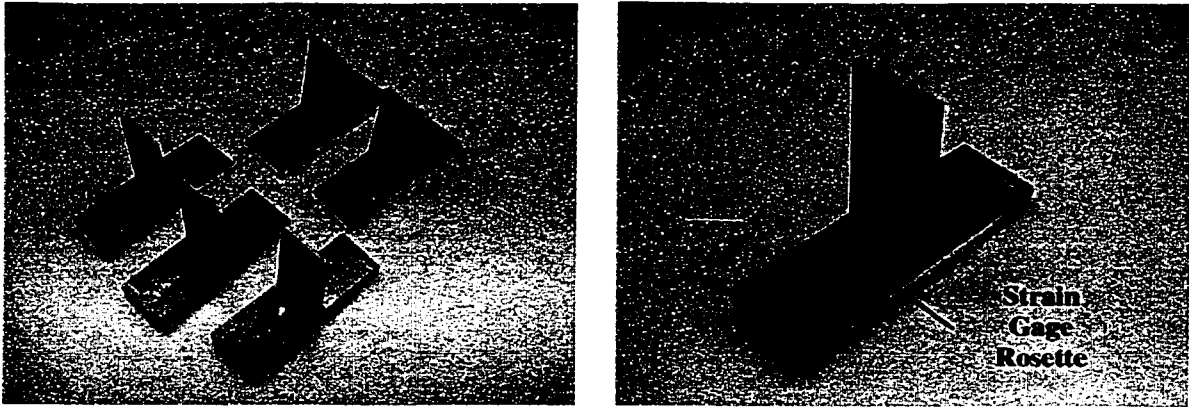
Typical T-300/PR520 T-Joint Fixed Support Tension Specimen: (a) Specimen Set and (b) Typical Specimen Showing Instrumentation.
